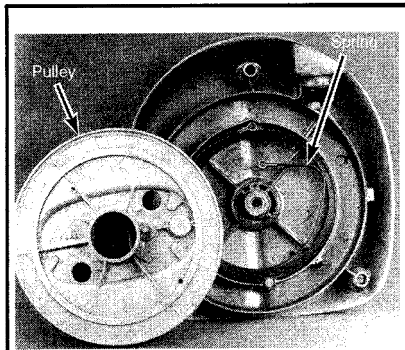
Typical pulley and spring assembly, as positioned to the housing assembly
